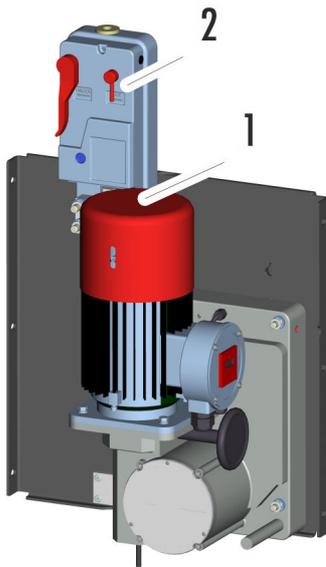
Rope hoist HW 608 CE18 and fall arrester HWL 608 CE of Hailo Wind Systems
